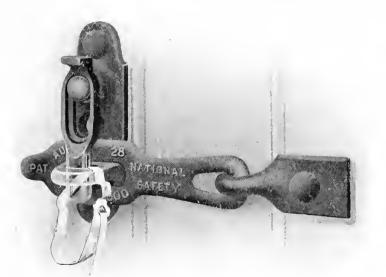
National Safety Car Door Fastener. Complete with Seal.
